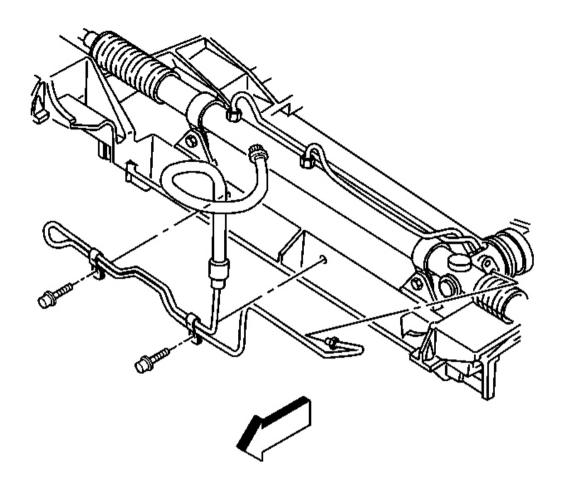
PS Cooler & Retaining Bolts Courtesy of GENERAL MOTORS CORP.
